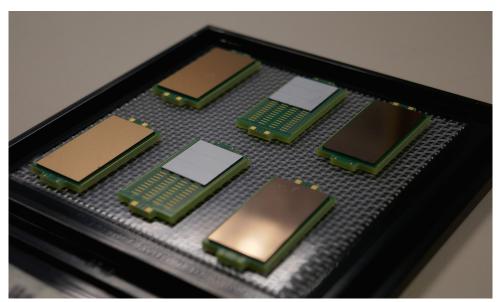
Multi-channel LGAD sensors bump bonded onto interposer PCBs.
